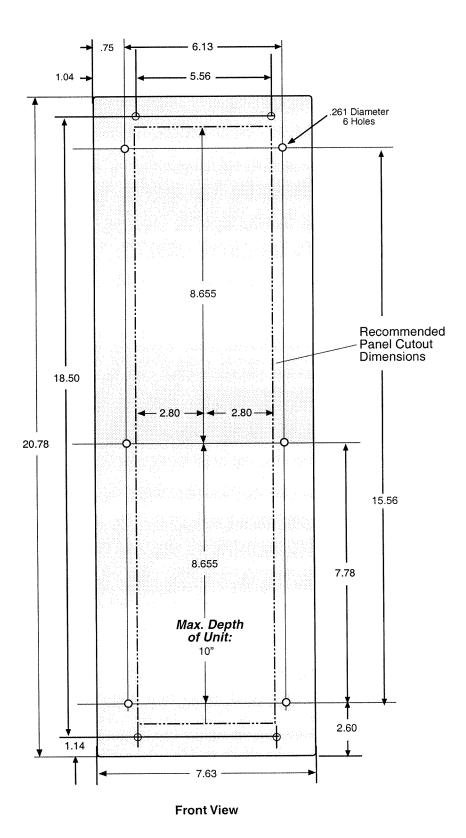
(H3) Mounting Dimensions for GE L-2 Cabinet
